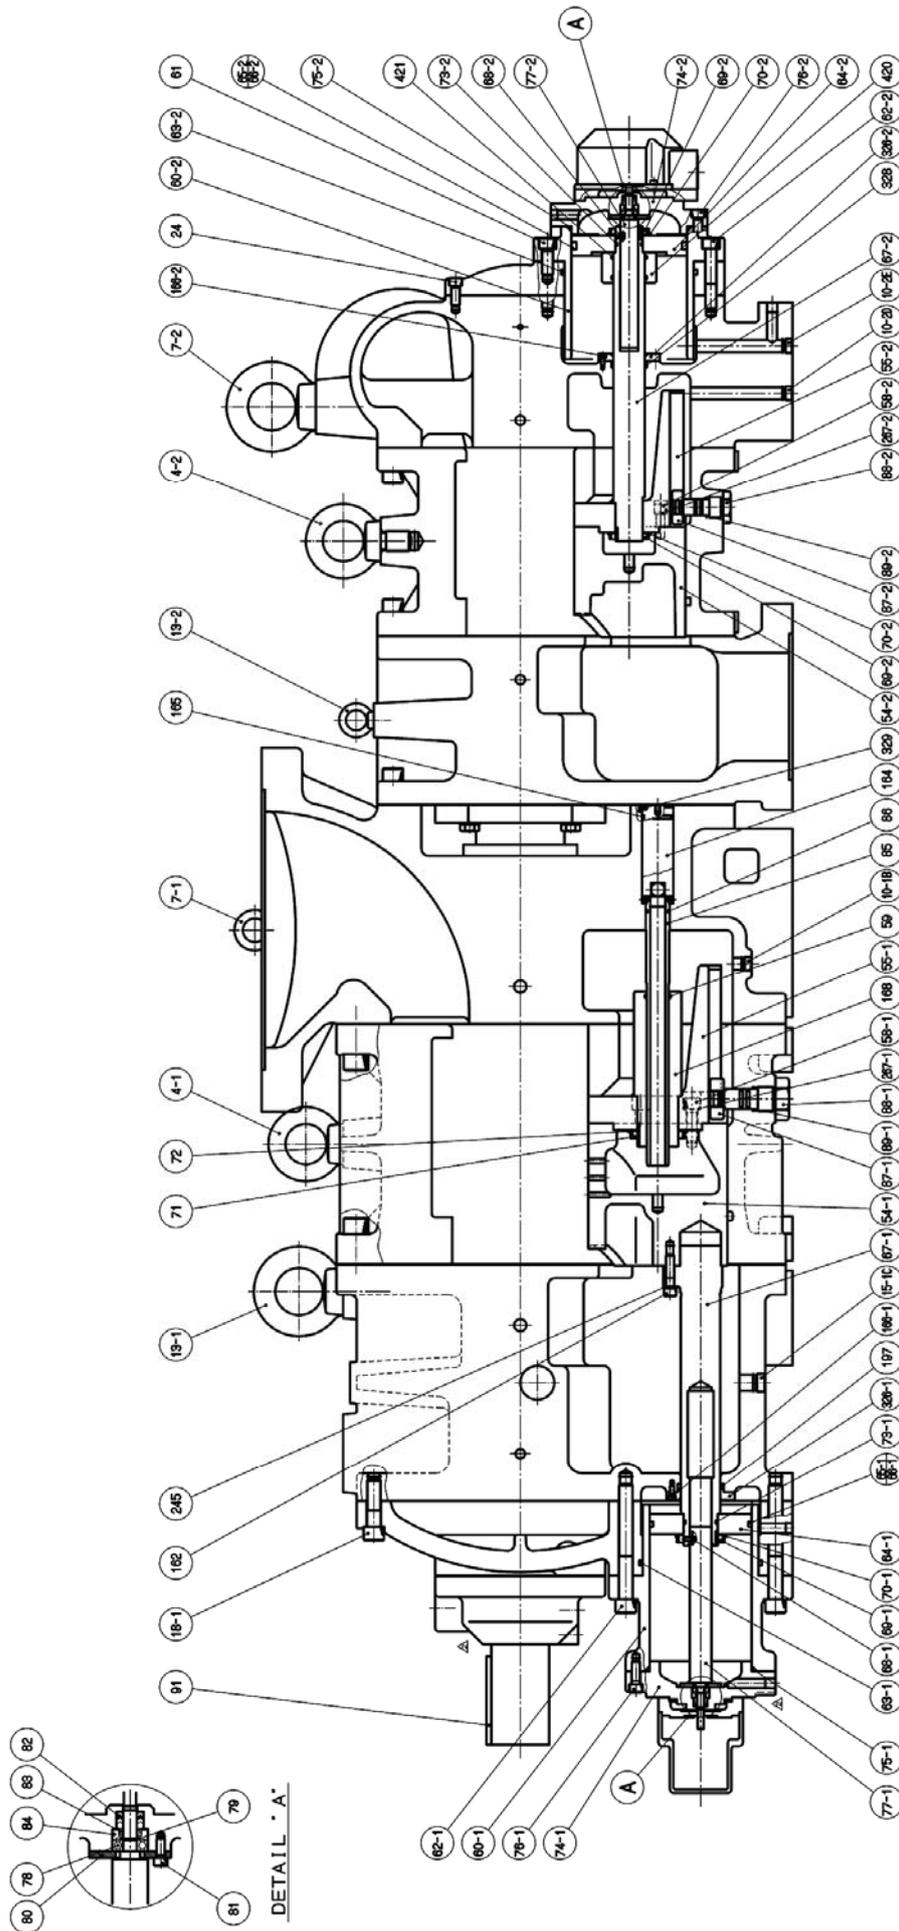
3225SSC Assembly Sectional View (Vertical)
